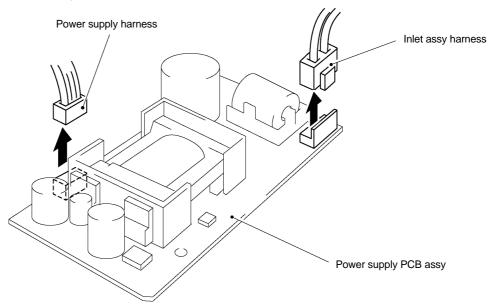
Removing the Inlet Assy and Power Supply Harnesses
